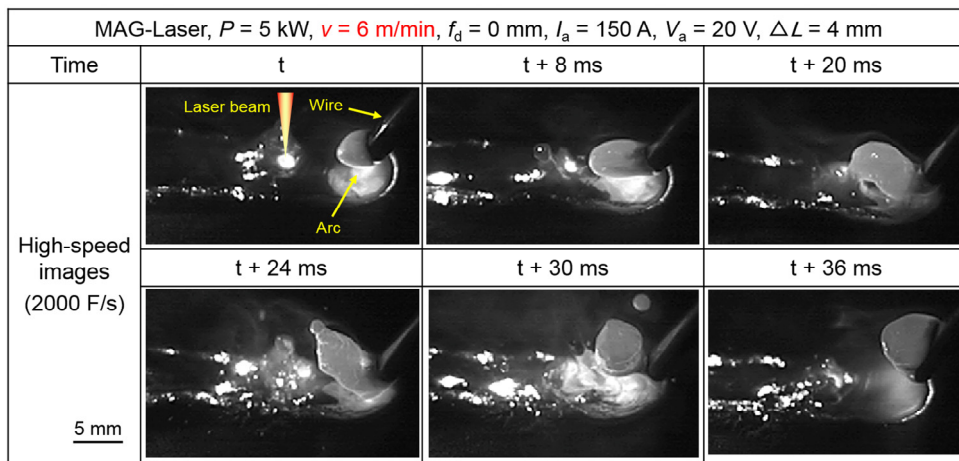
High-speed video observation results of molten surface behavior and wire melting during MAG-Laser hybrid welding at welding speed of 6 m/min.
